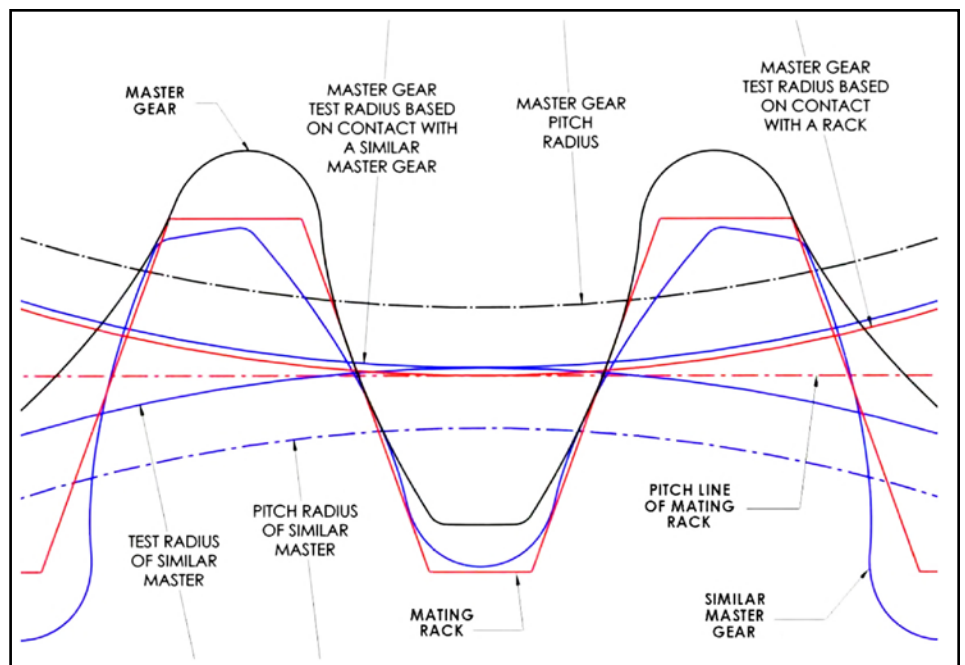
Test radius of a master gear (in black) against a rack (in red) or a similar master (in blue).
